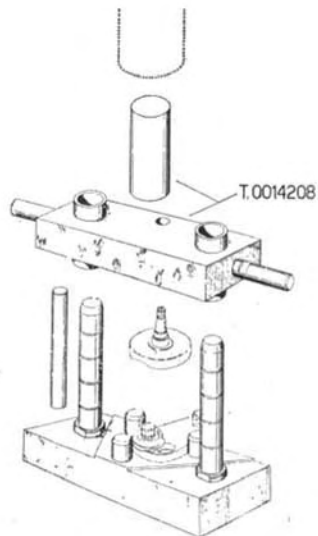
Re-assembling the crankshaft (2nd operation).
